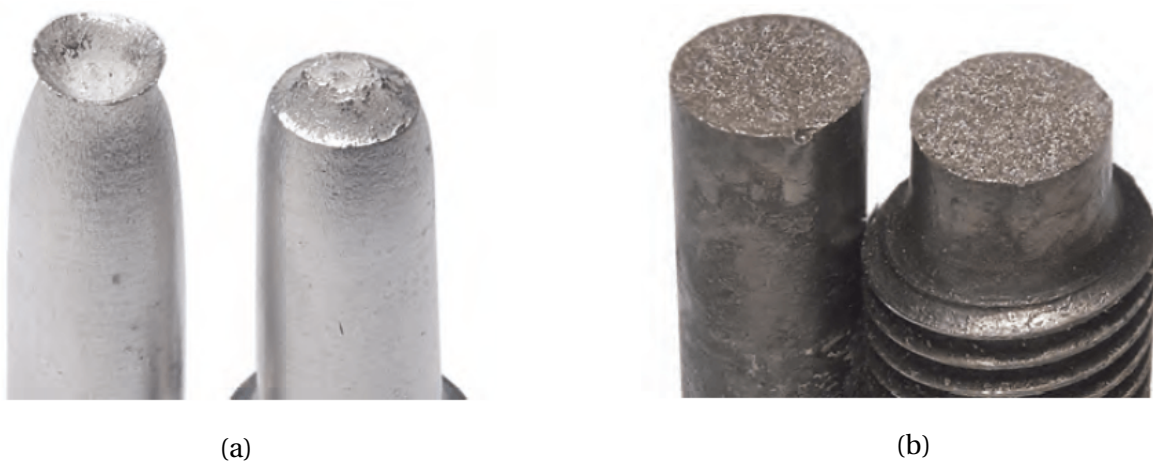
(a) Ductile cup-and-cone fracture. (b) Brittle fracture.
